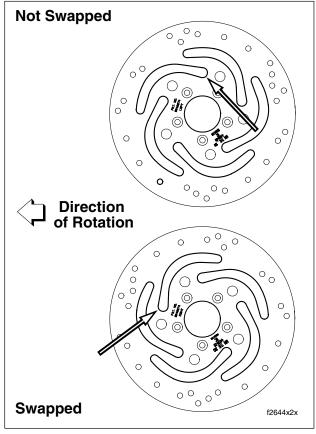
Note Bulb Shaped End of Slot (Left Side Brake Disc Shown)
